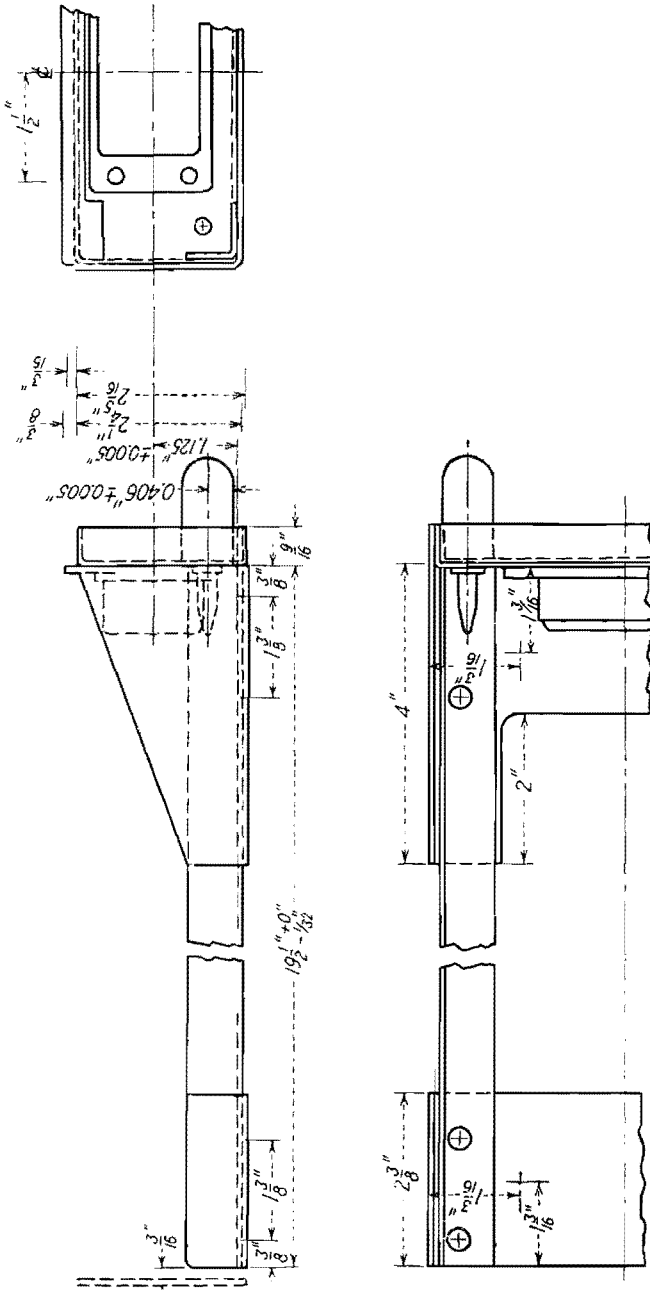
Further details of mounting for transport aircraft radio equipment. (Courtesy of Aeronautical Radio, Inc.)
